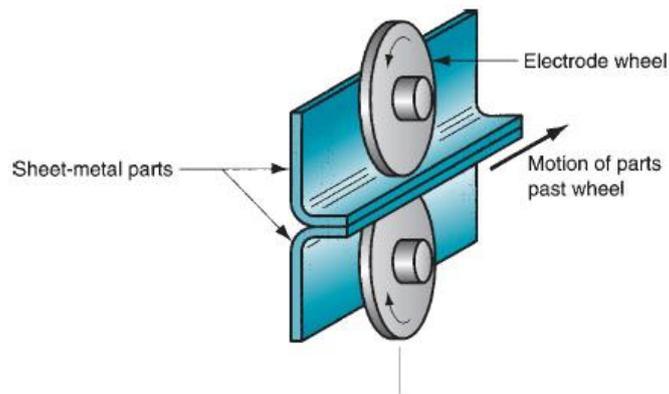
Typical scheme for resistance seam welding [4]
